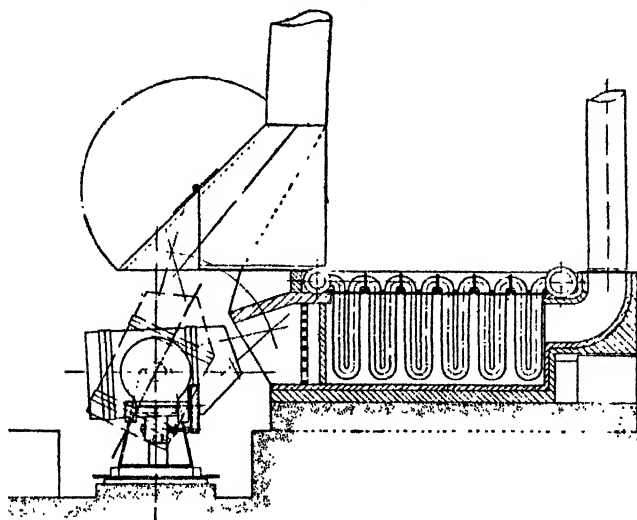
Elevation and plan arrangement of 3-ton Stock converter.
